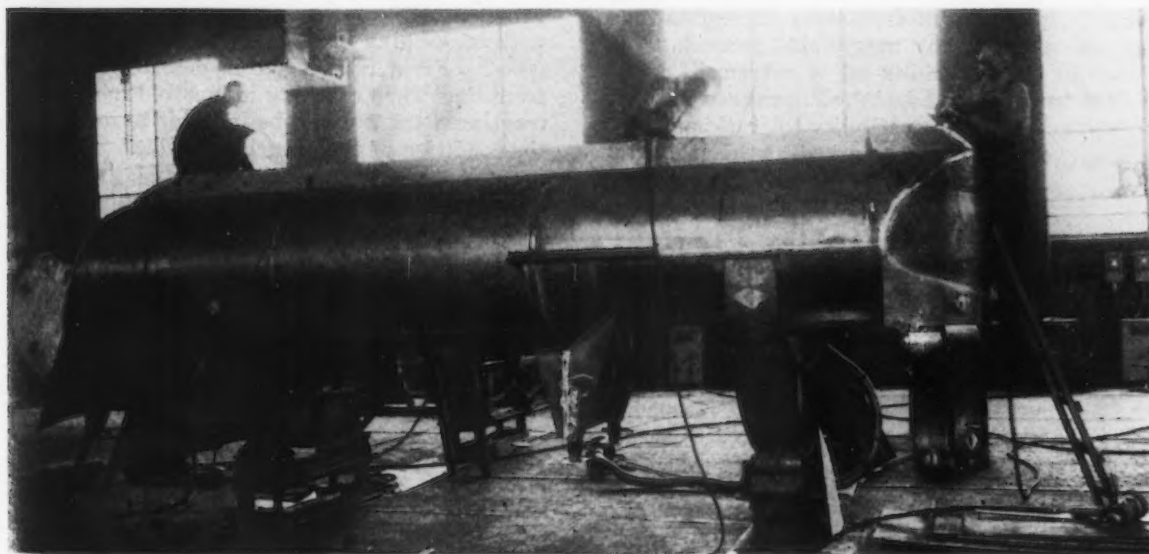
Typical of the work done by Kaustine is the welding of this 3400 gal semi-trailer. E-6011 electrodes were used.
